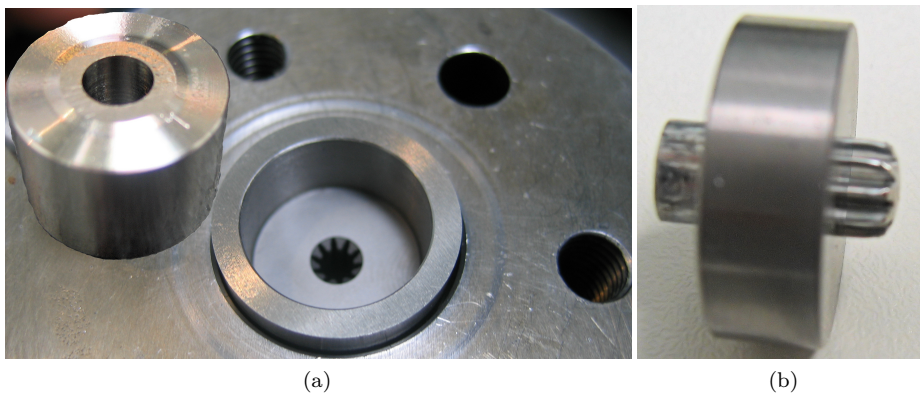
Photograph the extrusion tool parts (a). In this image the die and the tool holder ring is mounted in the aligning fixture. The container die can be noted on the side. The photo to the right (b) shows a billet pressed half-way through the extrusion die.
